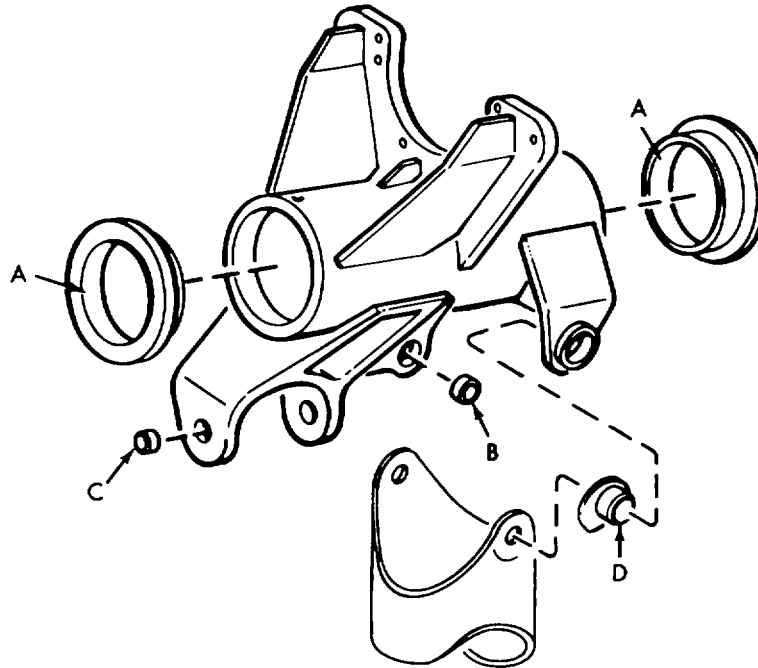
Index Boom Support - Bearing Removal Using Remover with Mechanic Kit Handle
